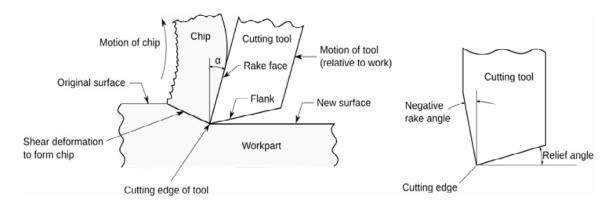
Cross-section of the machining process and tool with negative rake angle.
